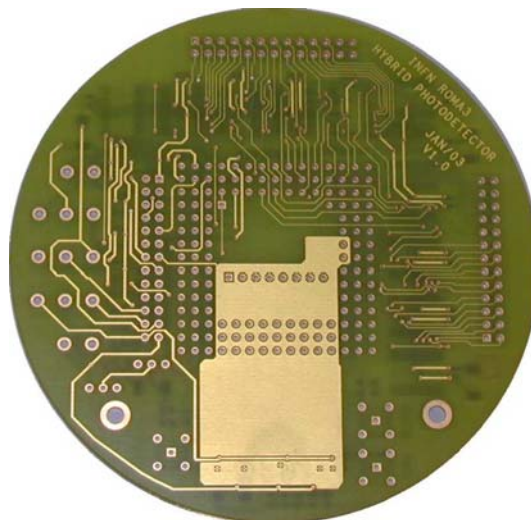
Photograph of the PCB for the new ISPA front-end card.
